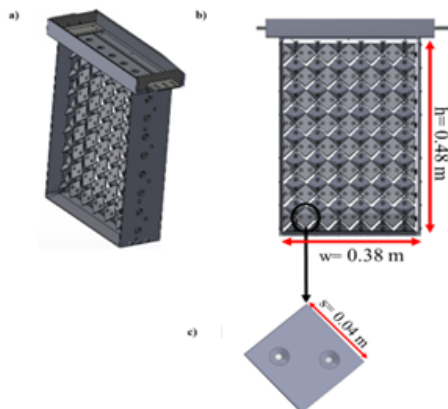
Three-dimensional schematic of the turbulence grid. a) Isometric view b) Front facing view with dimensions c) Winglet (square plate) with dimensions.
